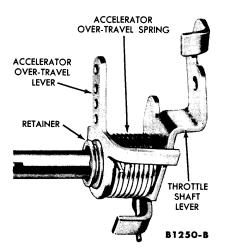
Accelerator Over-Travel Spring and Lever Installation
